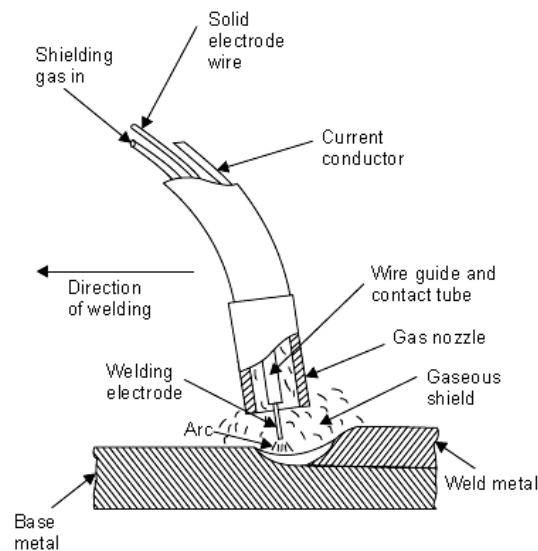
Metal Inert Gas (MIG) Welding
